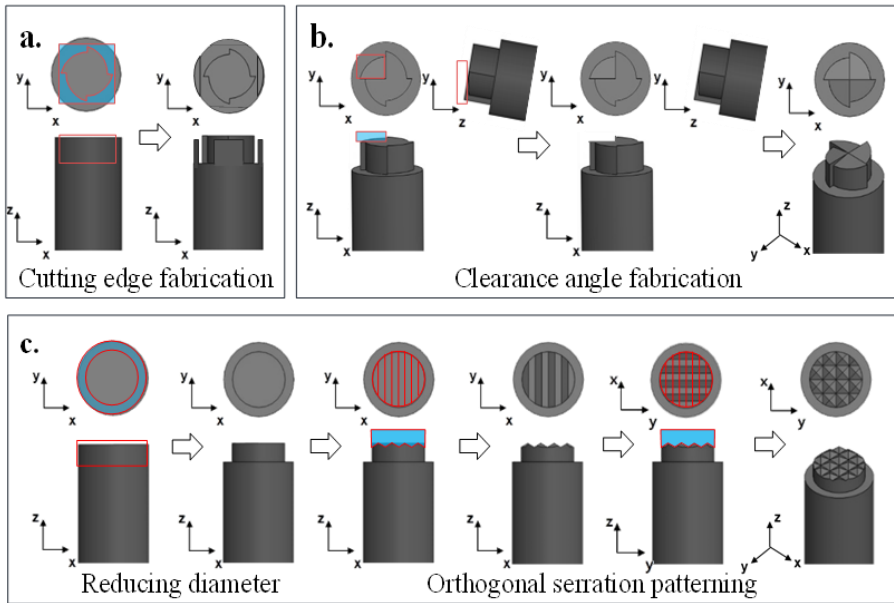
Fabrication procedure of 30- μ m-diameter micro-cutting tools using FIB: (a) cutting-edge fabrication, (b) clearance-angle fabrication through rotation, and (c) multiple-lattice edge tool [46]
